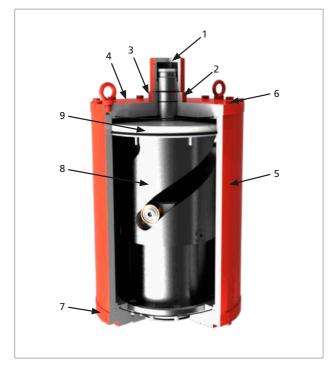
Pneumatic compact double effect actuator – Type B: threaded flanges parts description
